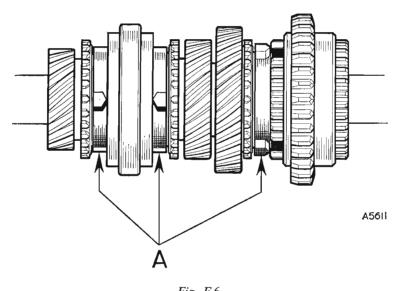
The mainshaft, showing (A) the baulk rings (later cars)
